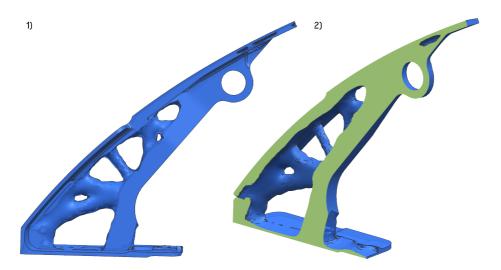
Door Connection Joint; Surface extracted 1) side view and 2) half view
